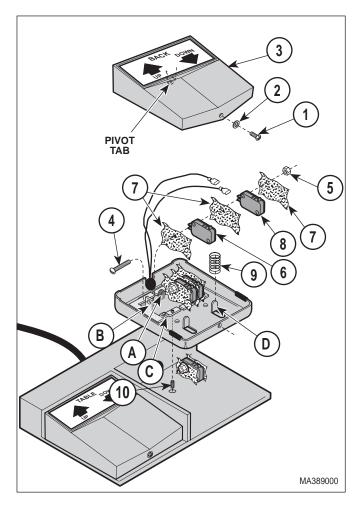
Footswitch Microswitch Removal / Installation / Adjustment
